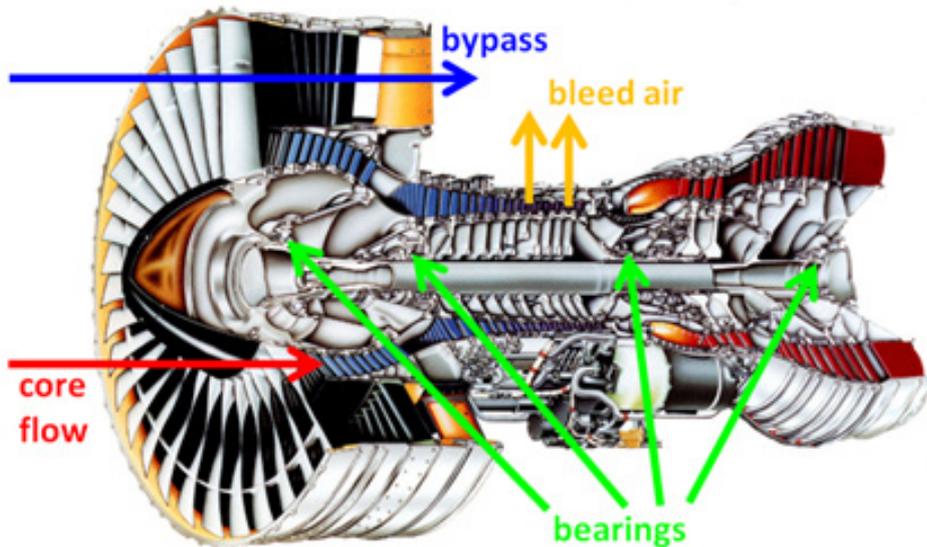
Engine bearings and bleed air (based on P&W 2014).
